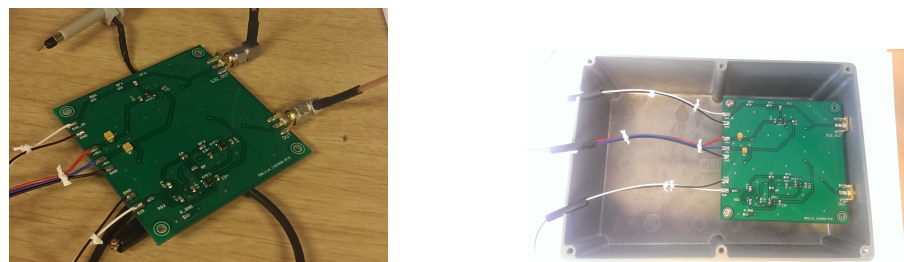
Image of the amplifier PCB with mounted components and cables connected (left) and PCB mounted inside RFI box (right)
